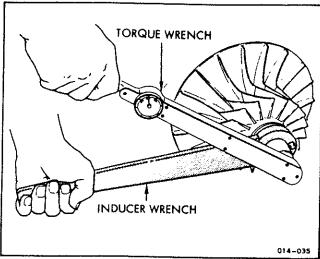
Removing and Installing Inducer Nut and Checknut.
